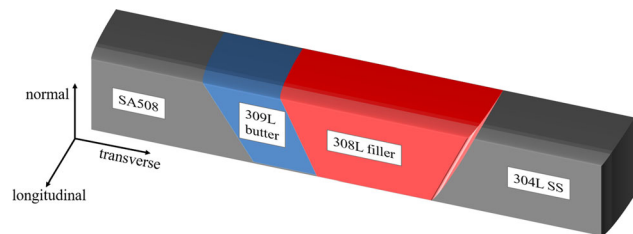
Schematic illustration of the SA508-SS 304L DMW with SS 308L filler and SS 309L butter. The longitudinal direction corresponds to the weld bead direction. The weld bevel angle is 60 degrees.
